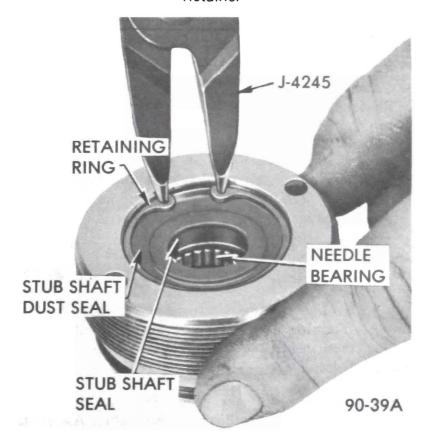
Removing Stub Shaft Seal Retaining Ring
